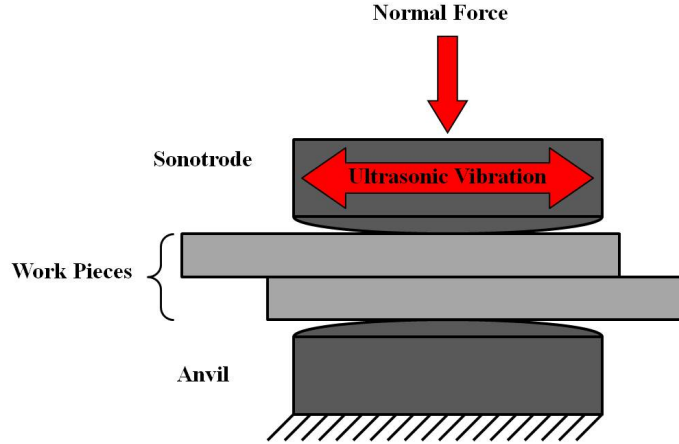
Schematic of ultrasonic metal welding process.
